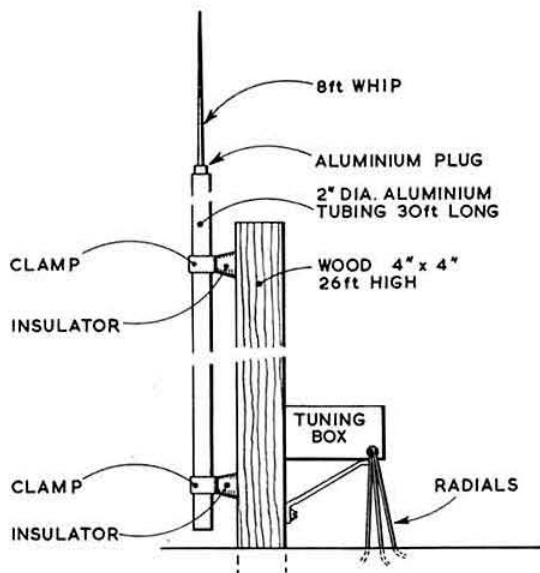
The construction used in the prototype. The use of three telescoped mast tubes with a larger diameter base section would allow the height of the wooden support to be reduced.
